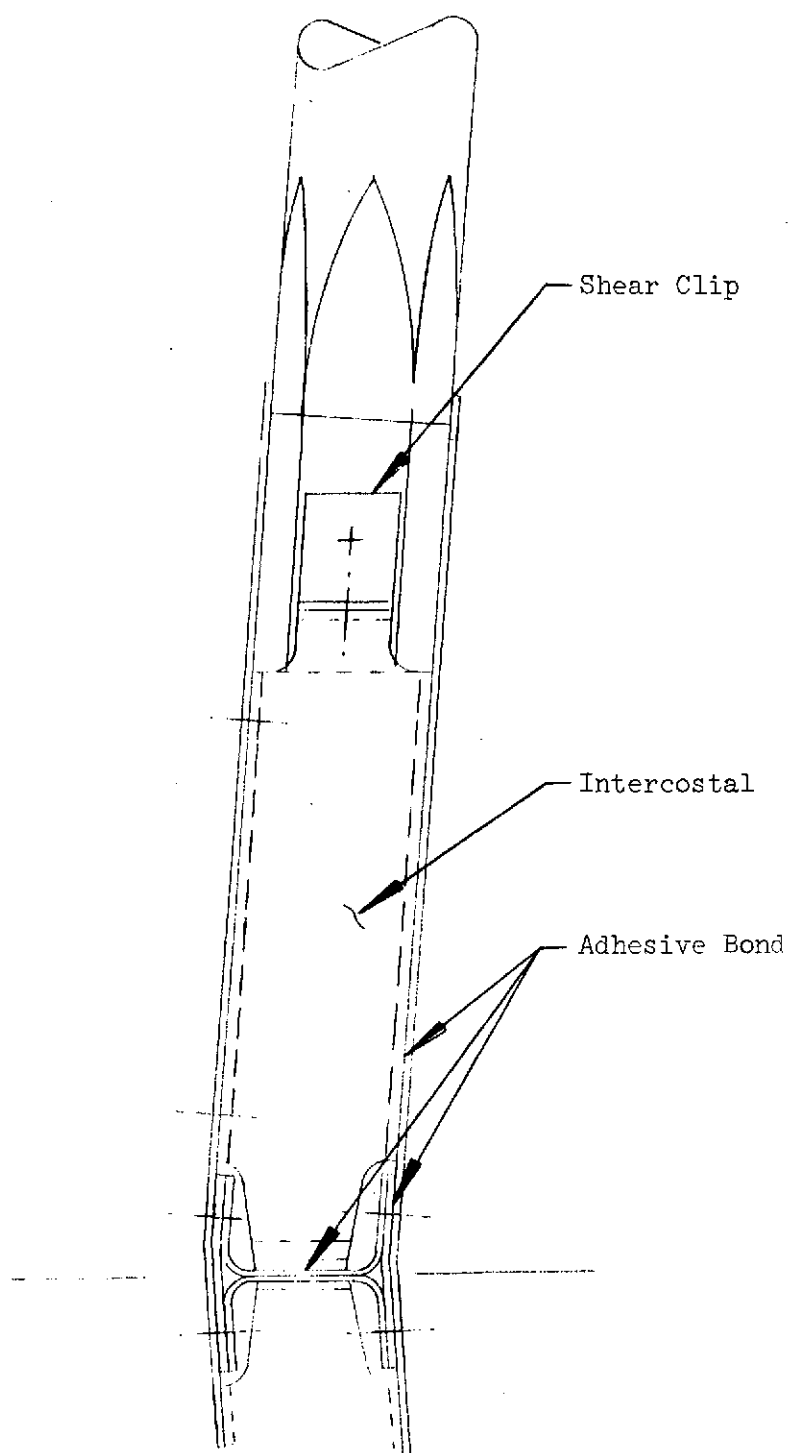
Tube/Apex Assembly, Typical Intersection - Front View
